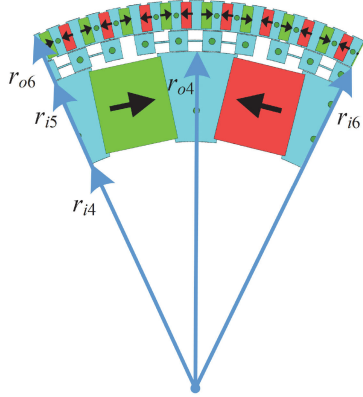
Initial design of the stage 2 flux-focusing magnetic gearbox with a 0.5 mm air gap
